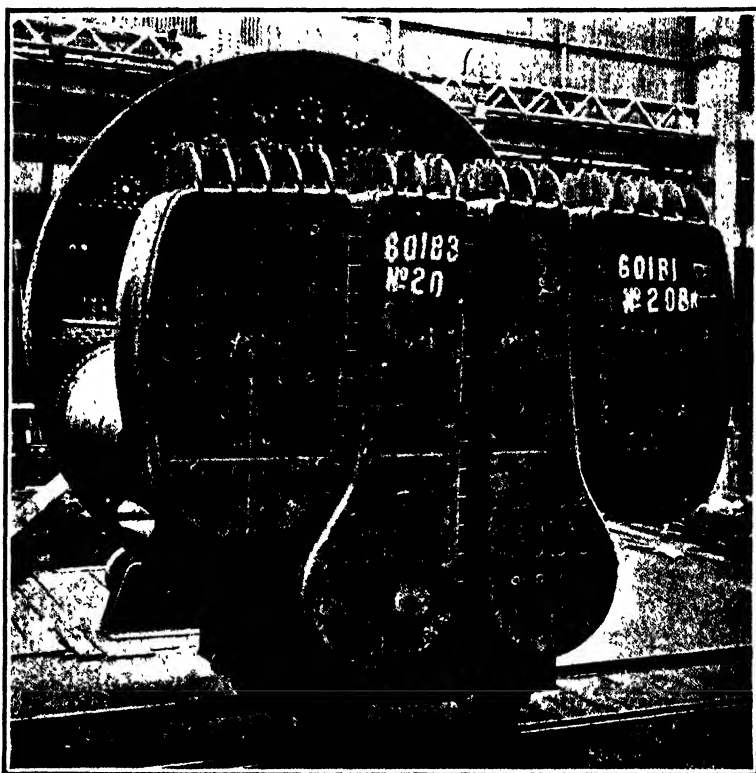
Scotch boiler under construction—rear view. Showing the four combustion chambers.
